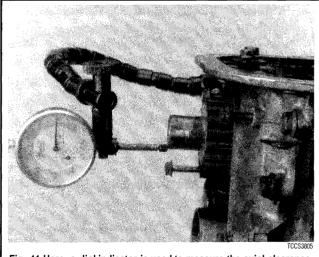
Here, a dial indicator is used to measure the axial clearance (end play) of a crankshaft during a powerhead rebuilding procedure
